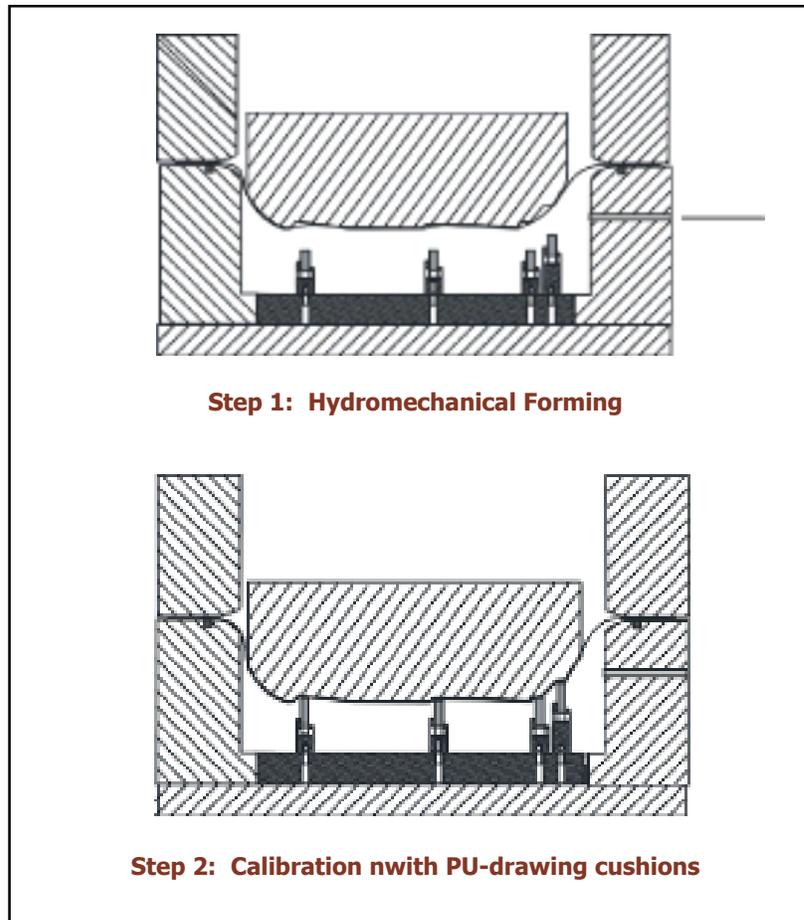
Combined hydromechanical manufacturing process
